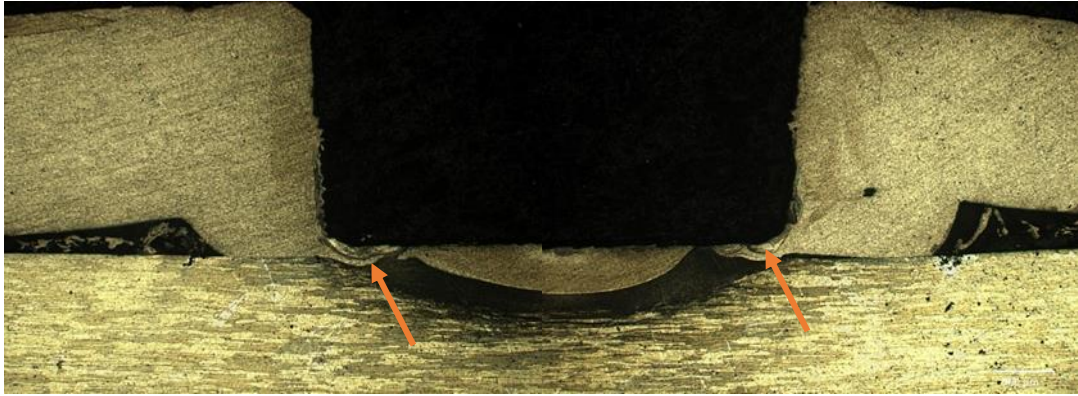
Cross Sectional view 2nd Experiment of Sample Set B
